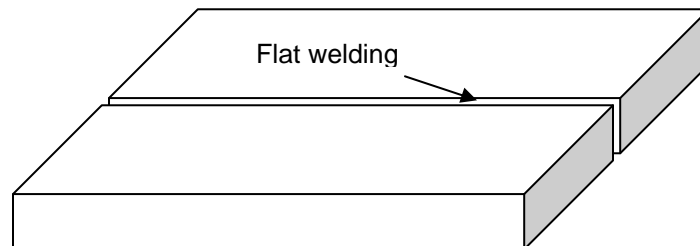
Scheme of placement of components to be welded for flat welding
